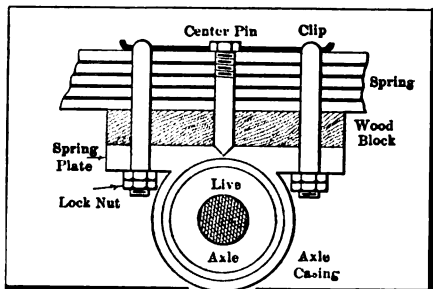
Showing method of inserting block of wood to increase car's clearance
